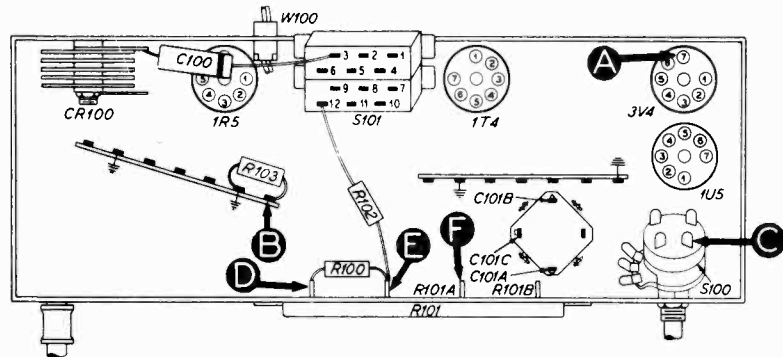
Bottom View, Showing Section 1 Test Points TP-5355A-1
